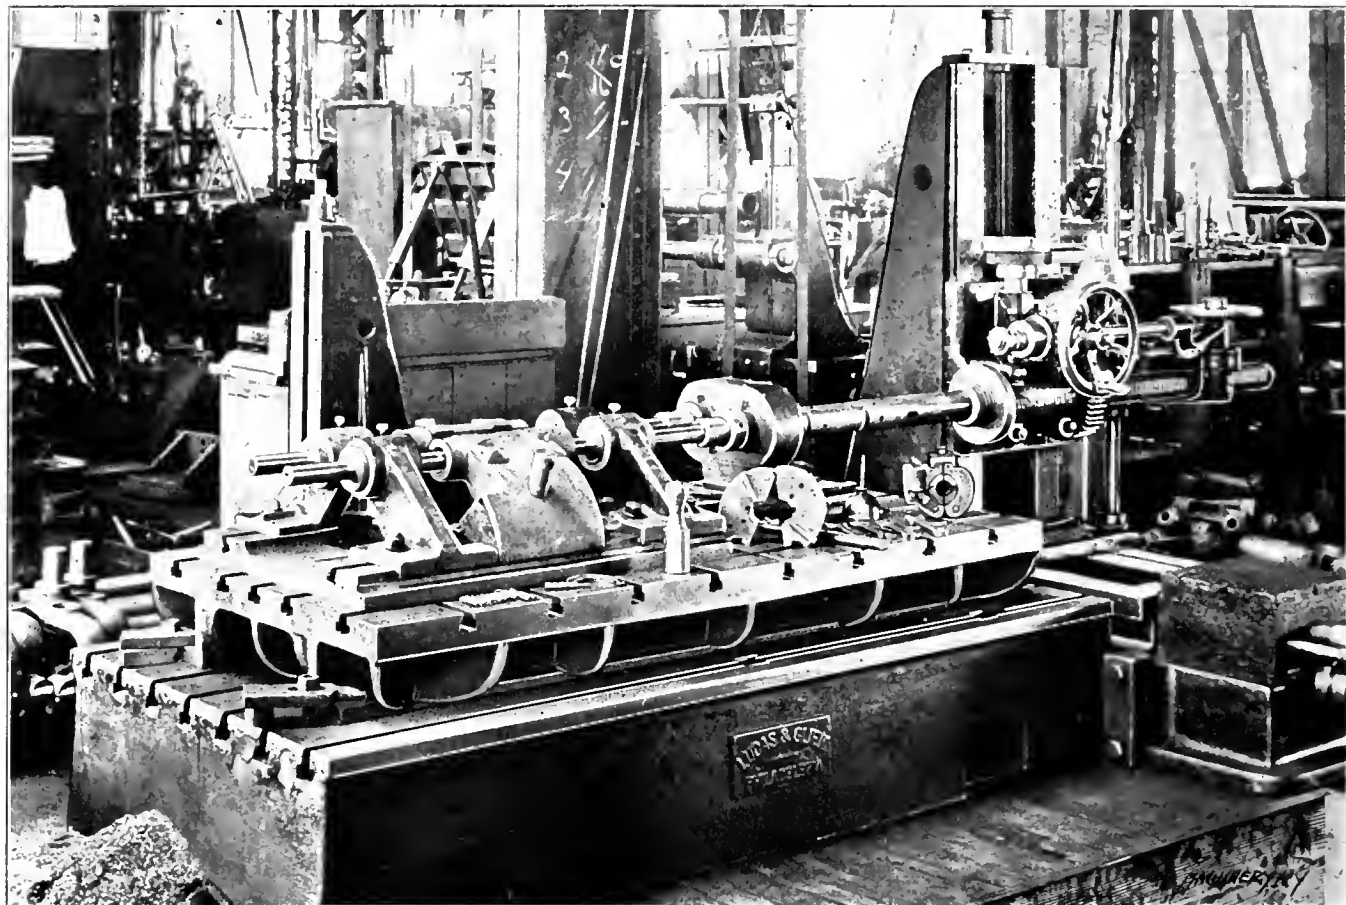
Boring Two Pieces at once with a Double-spindle Head Guided by Ways on Fixture
